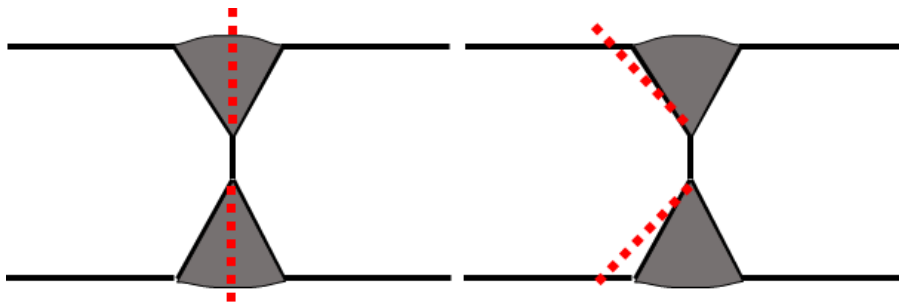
In double-beveled groove welds, the maximum principal stress criterion always predicts a failure plane through the weld metal (left), while other failure planes may occur in the base metal (right).
